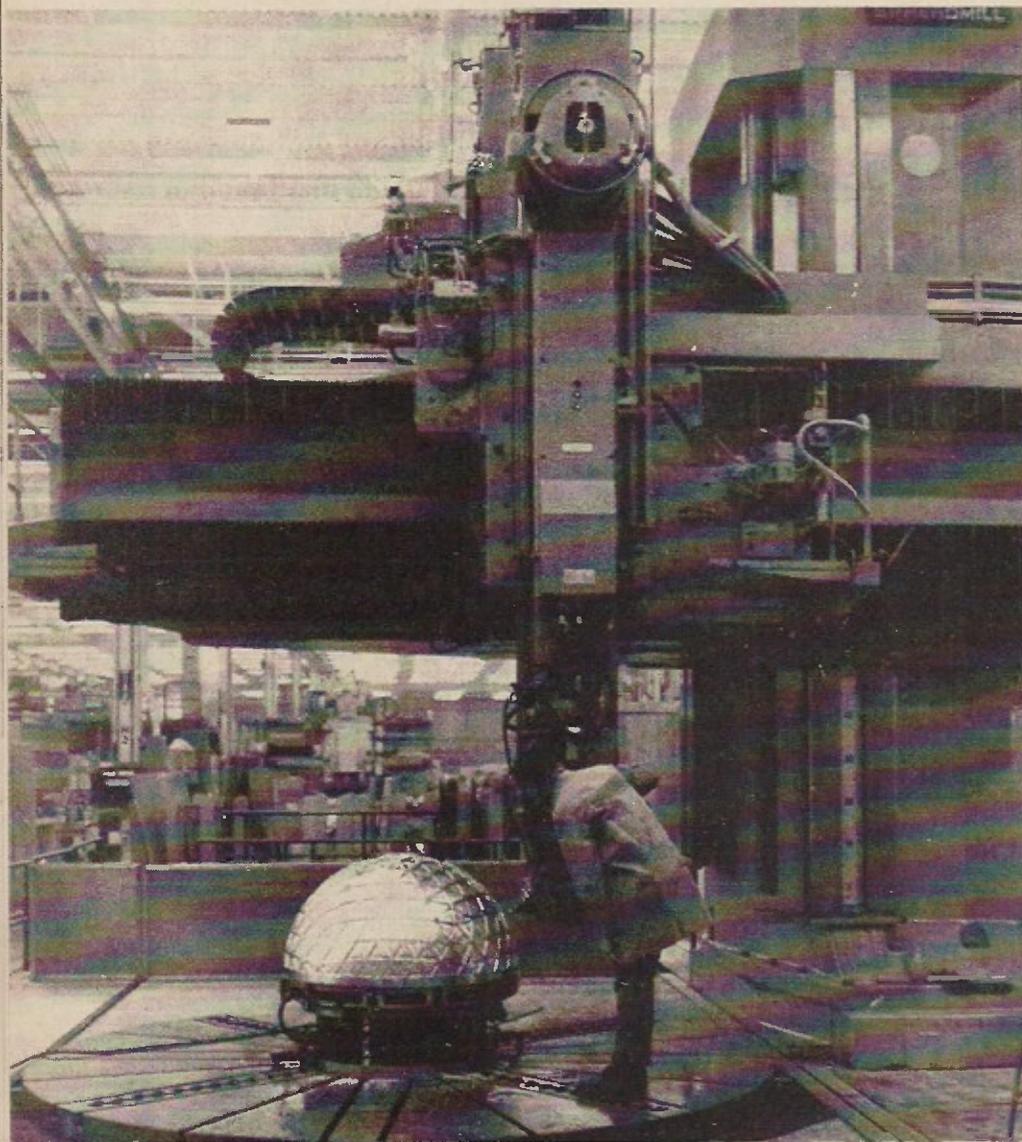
A Froriep five axis numerically-controlled mill machining a fuel tank for a Saturn V Moon rocket. The finished thickness of the steel is between 0.5 and 0.8 mm.
